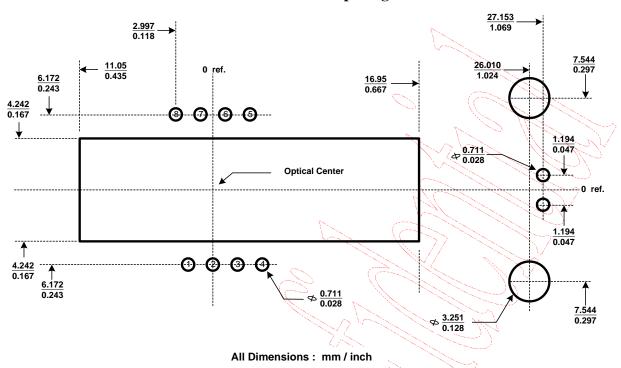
Recommended PCB Mechanical Cutouts and Spacing
